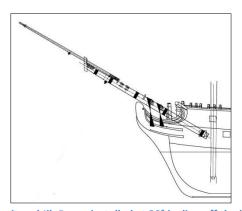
Bowsprit and Jib Boom installed at 30° incline off the bow of the ship
